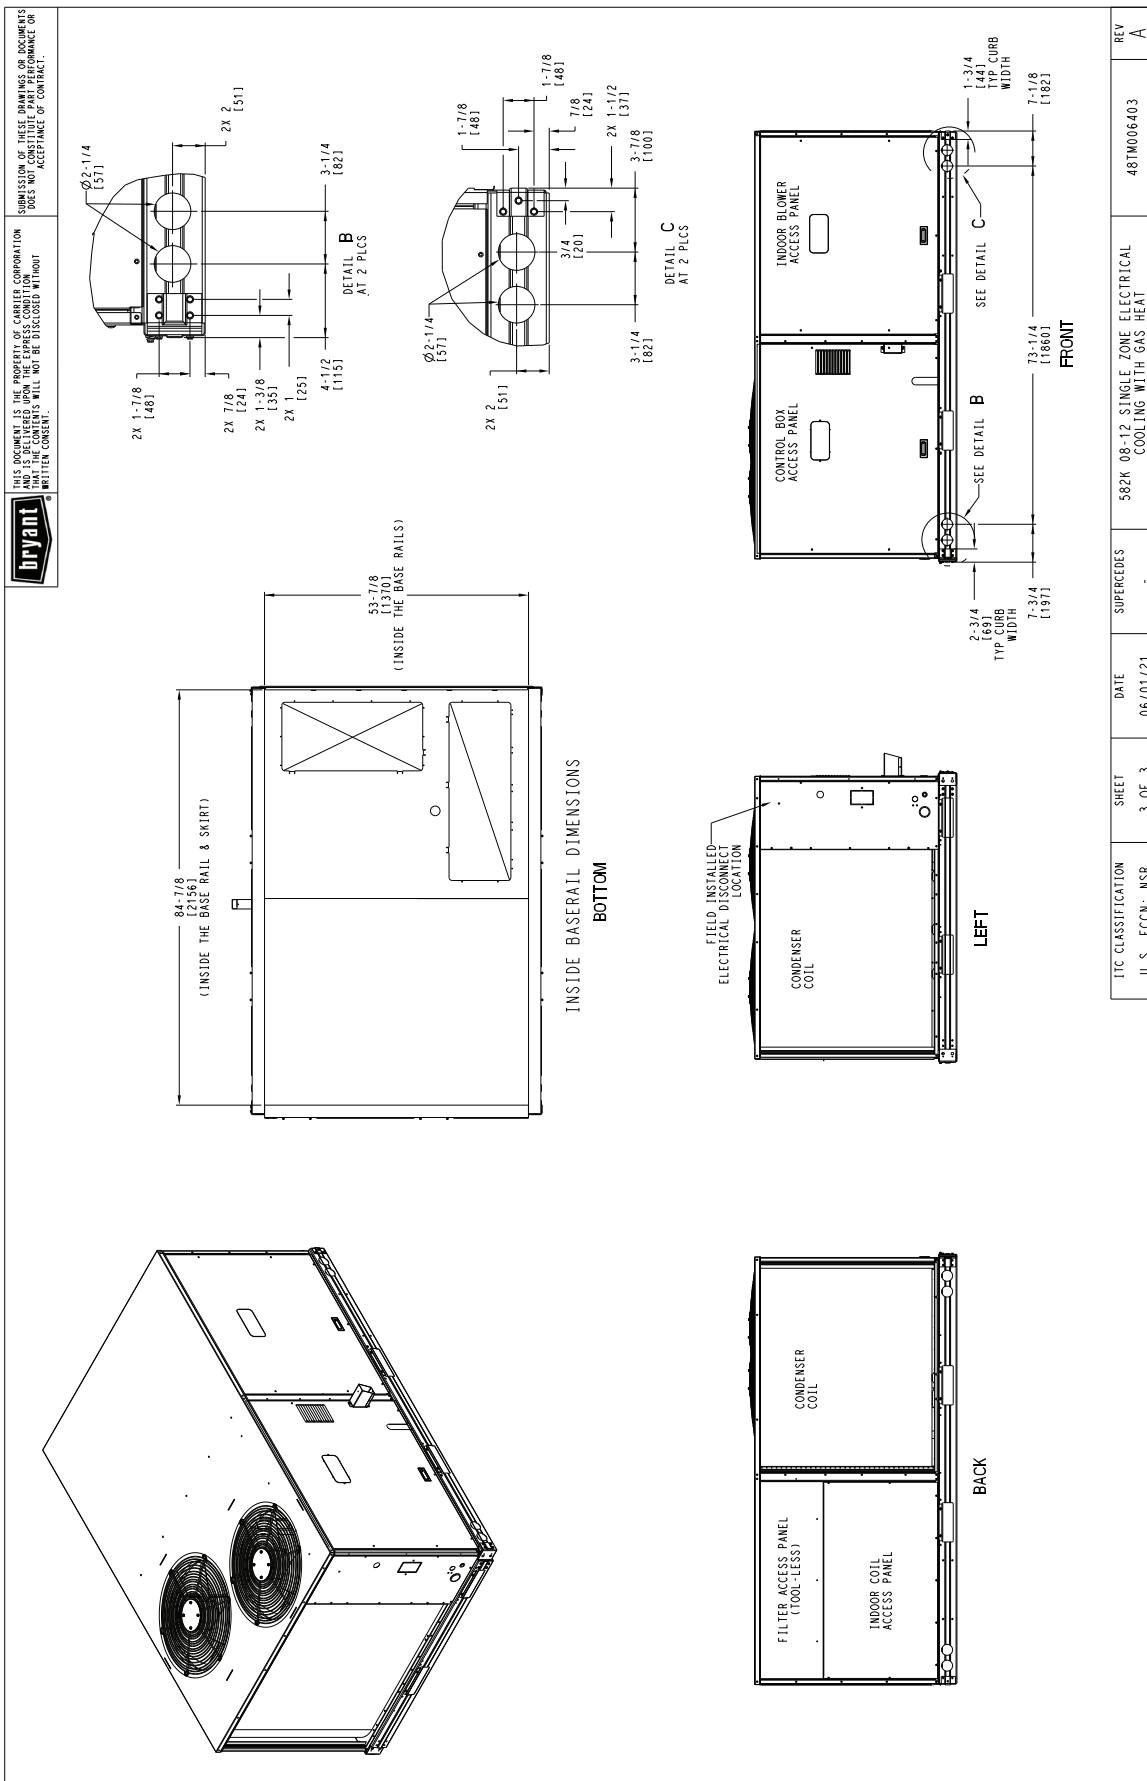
582K\*\* 08-12 Unit Dimensional Drawing (cont)
